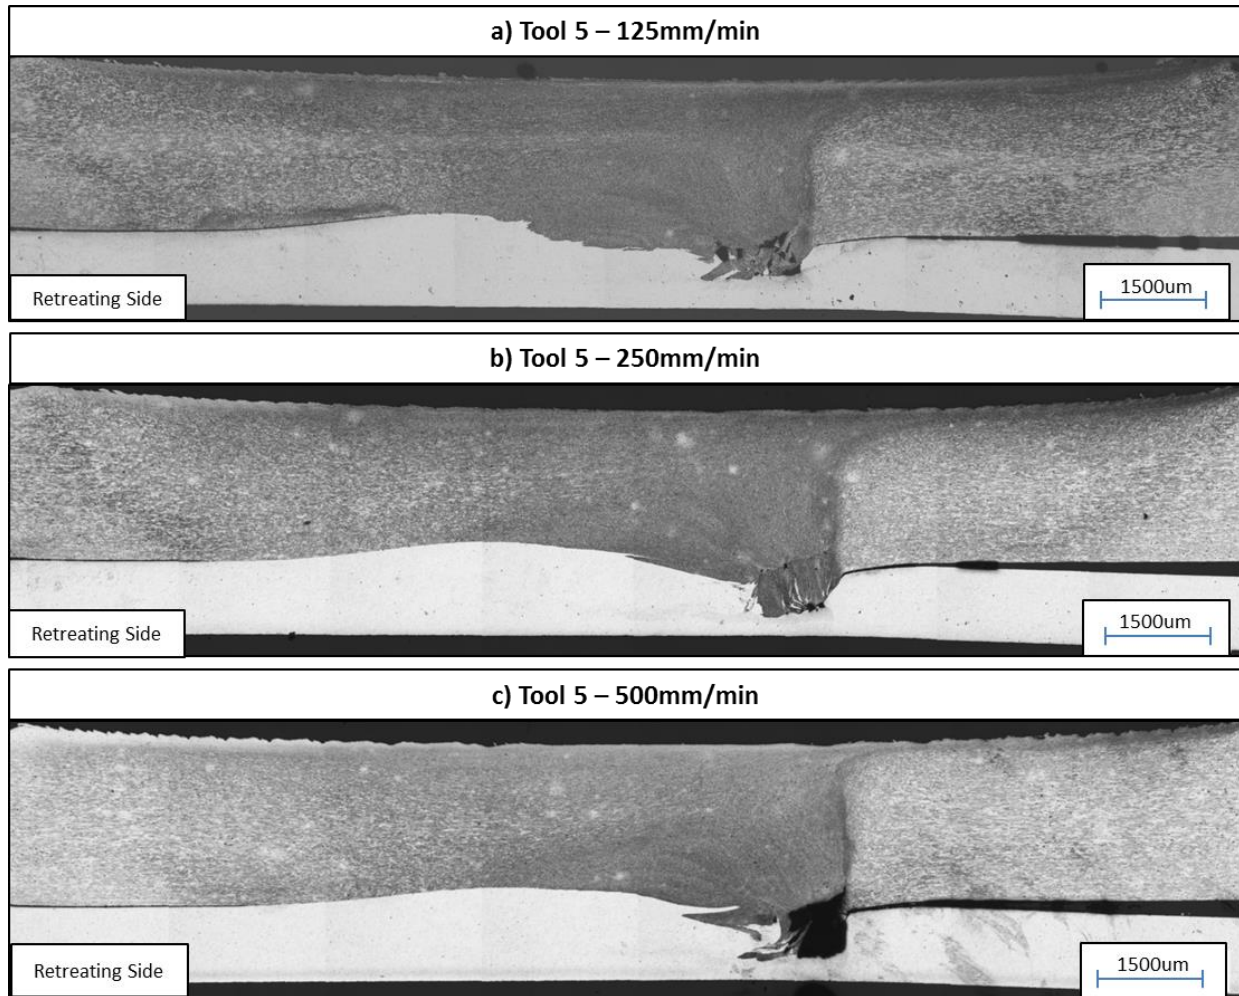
Optical micrograph images of a dissimilar AA7075/AA6022 FSW made at the following conditions: (a)Tool5-125mm/min (b)Tool5-250mm/min (c)Tool5-500mm/min
